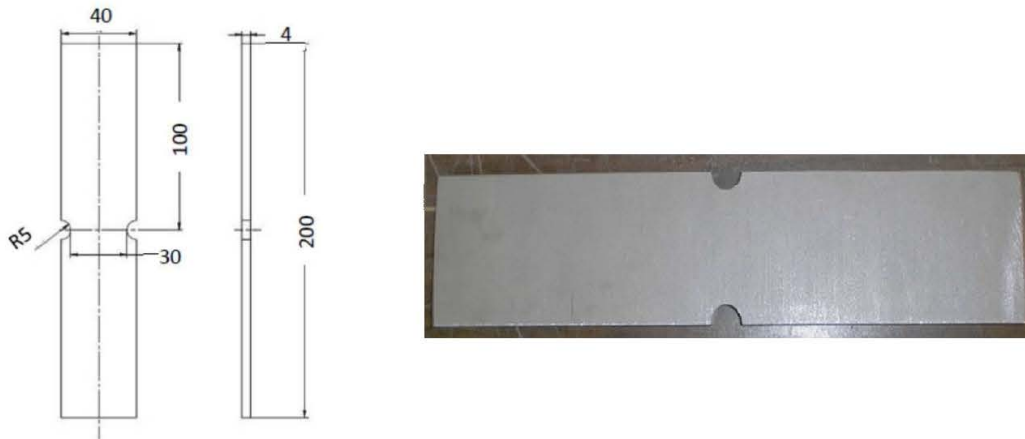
(a) geometry and dimension of the specimens; (b) picture of the specimen.
